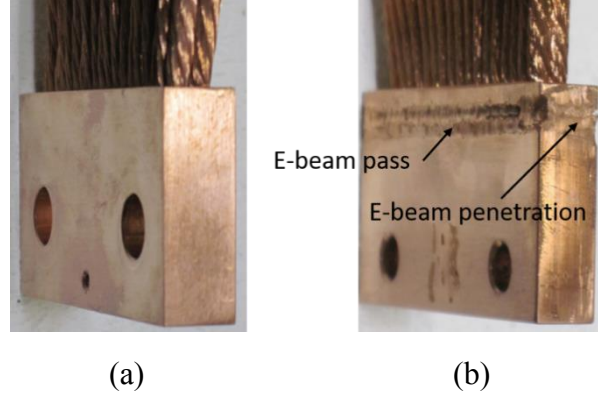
Strap end-lug (a) as-is (b) after e-beam welding.
